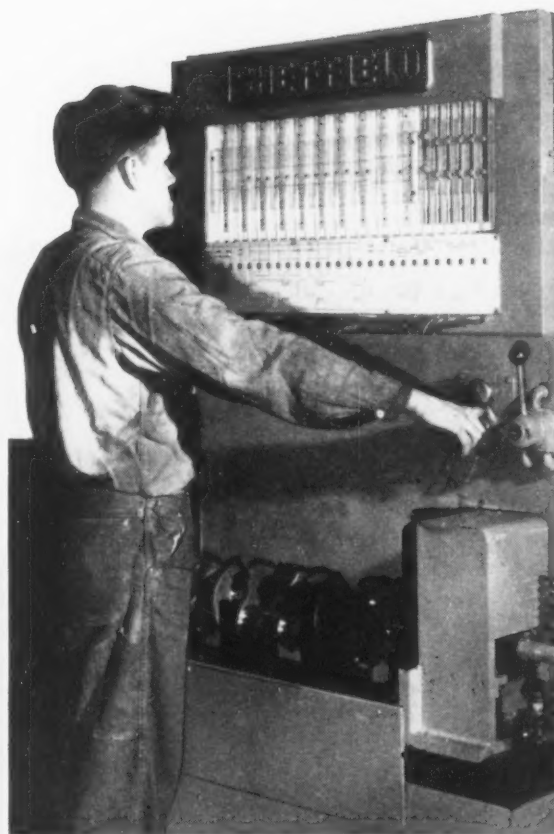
Final dimensional check of Ford six-cylinder engine crankshafts is made on this machine. Air gages measure 27 critical dimensions.
